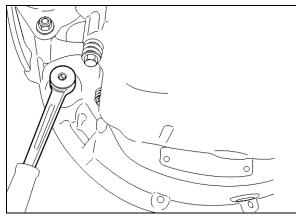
VOLVO ENGINE CRANKING POSITION
